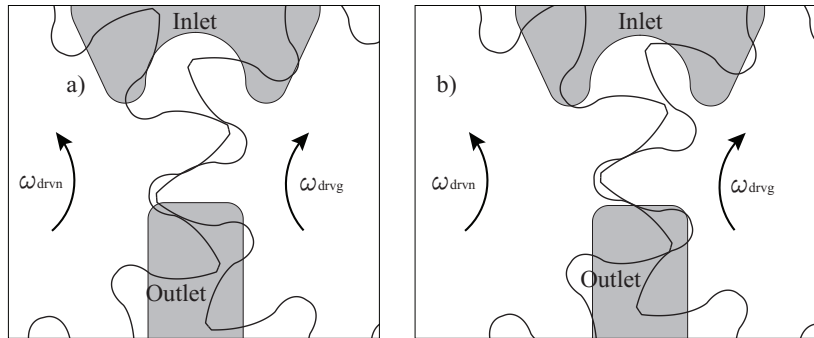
Helix gear exposed to the balancing plate grooves frontal view (a) and rear view (b)
